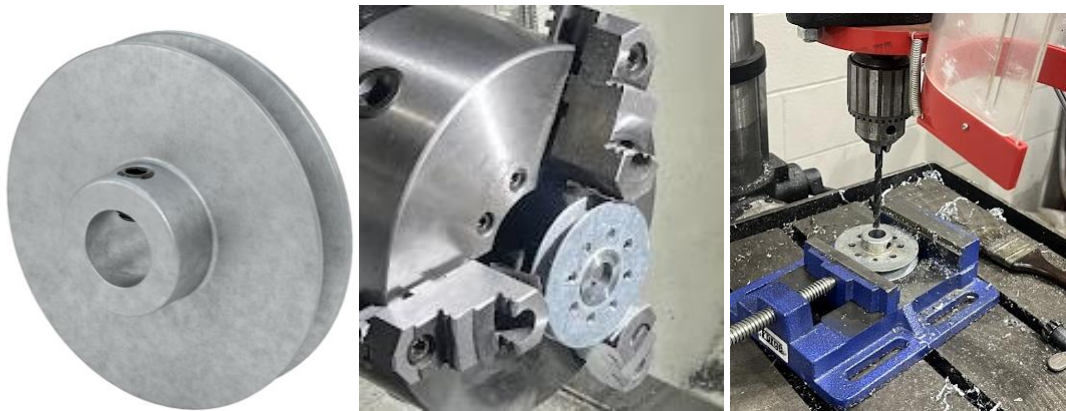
Driven Pulley Fabrication on Lathe & Drill Press
